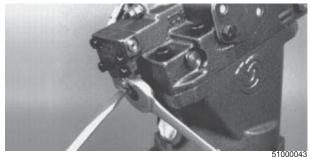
Tighten Charge Pressure Relief Valve Lock Nut
